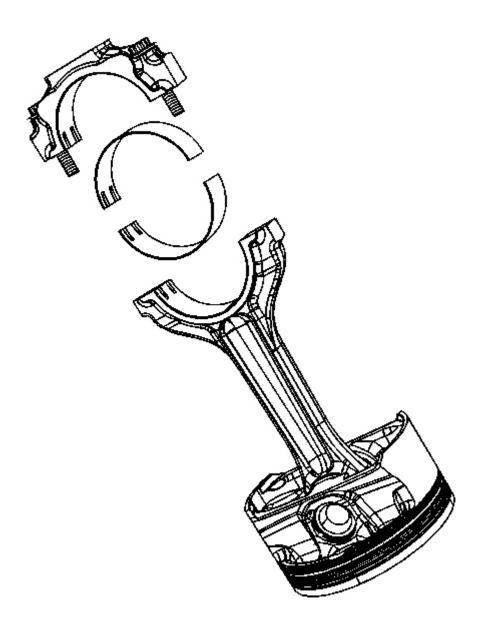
View Of Piston, Connecting Rod & Bearing Assembly Courtesy of GENERAL MOTORS CORP.
